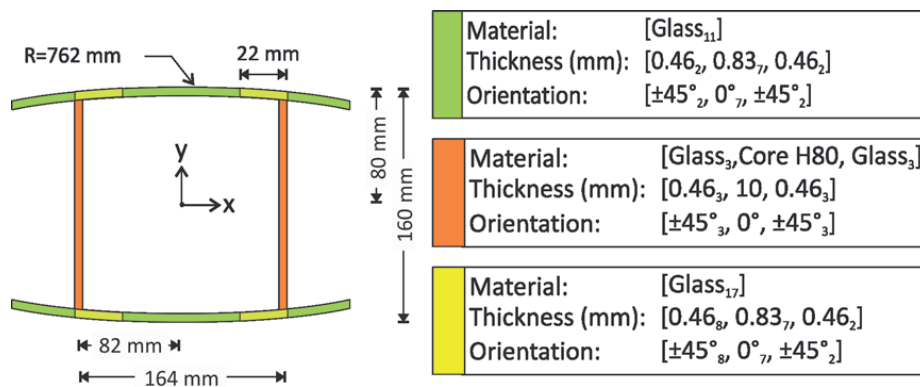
Dimensions and material definition of spar cross section shell model.
